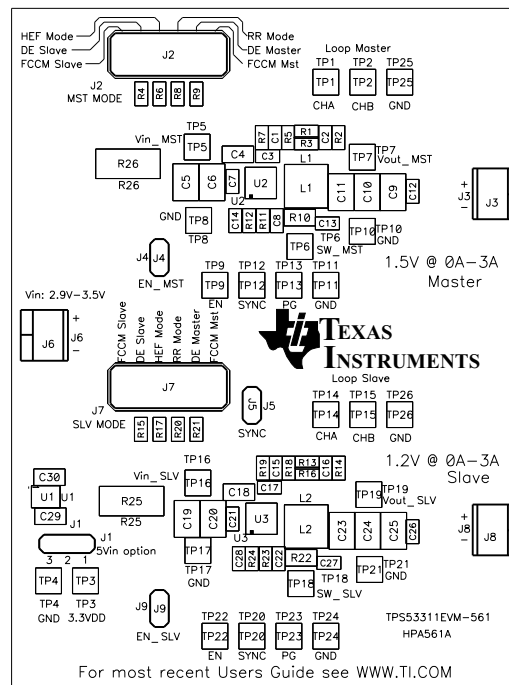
TPS53311EVM-561 Top Layer Assembly Drawing, Top view
